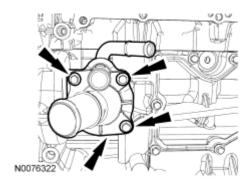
Locating Thermostat Housing, Thermostat And Bolts Courtesy of FORD MOTOR CO.
